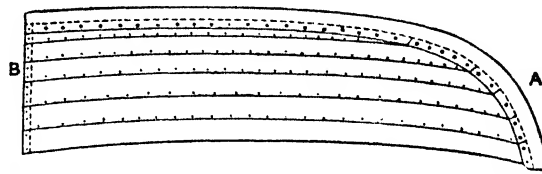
Showing Gore Piece Flanged Out Against the Keel
